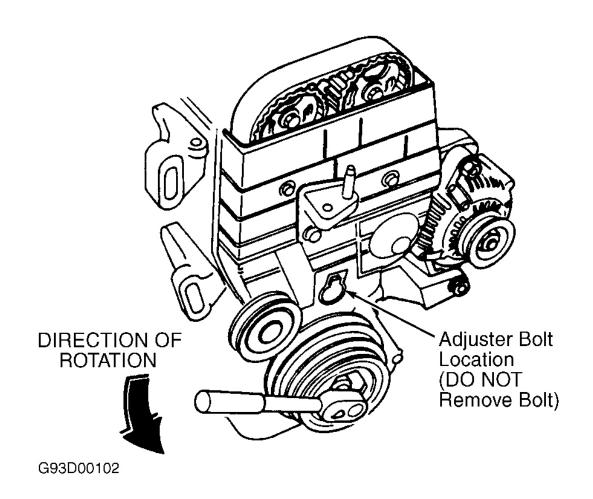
Locating Timing Belt Adjuster Bolt Courtesy of AMERICAN HONDA MOTOR CO., INC.
